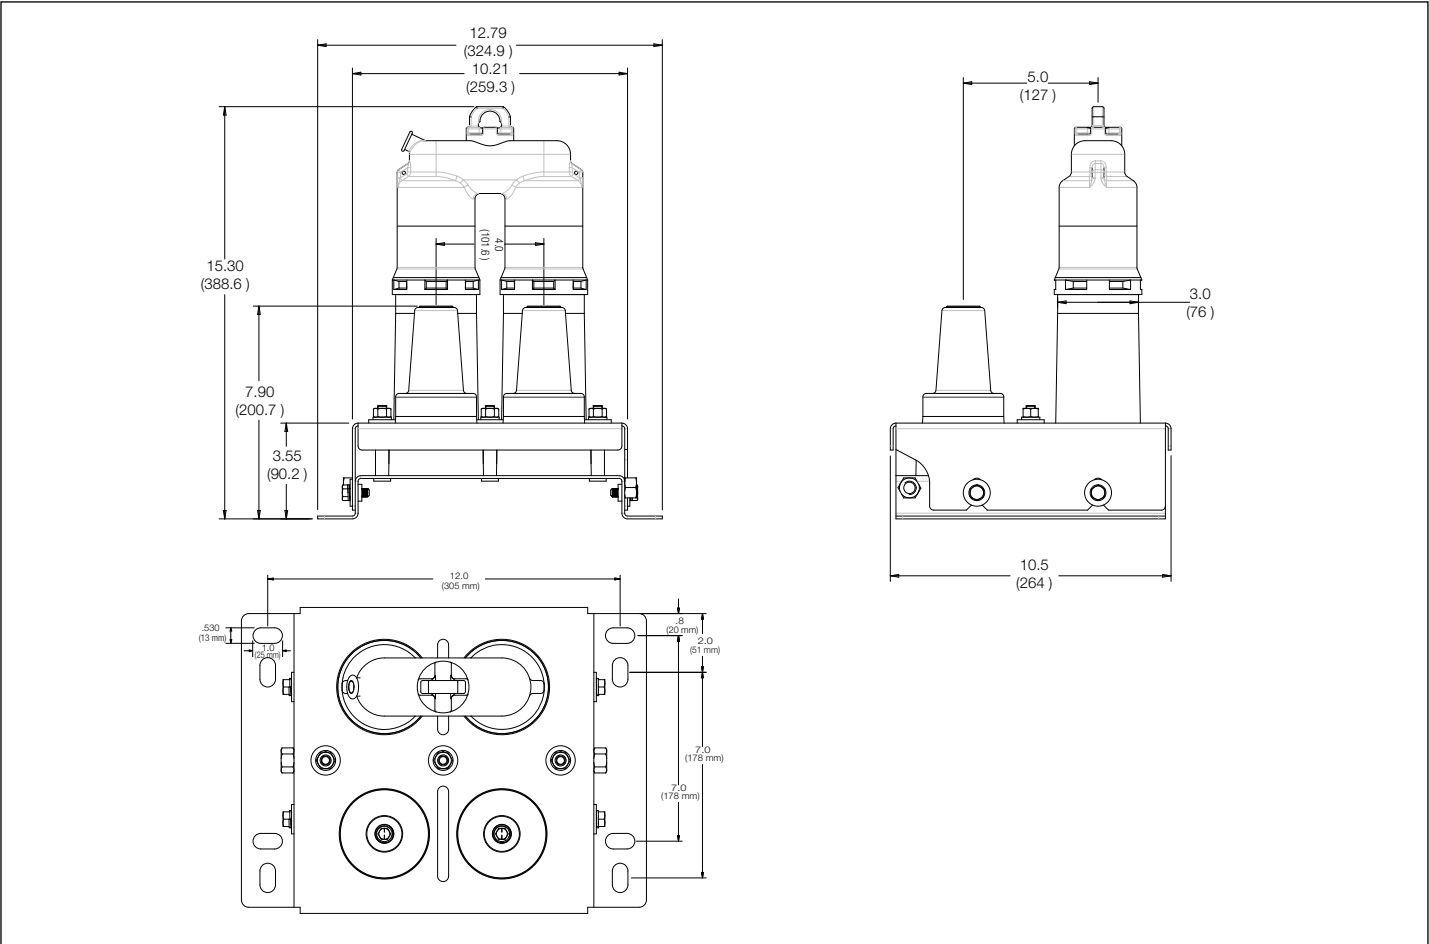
Cleer loadbreak connector assembly (square stainless steel bracket)
